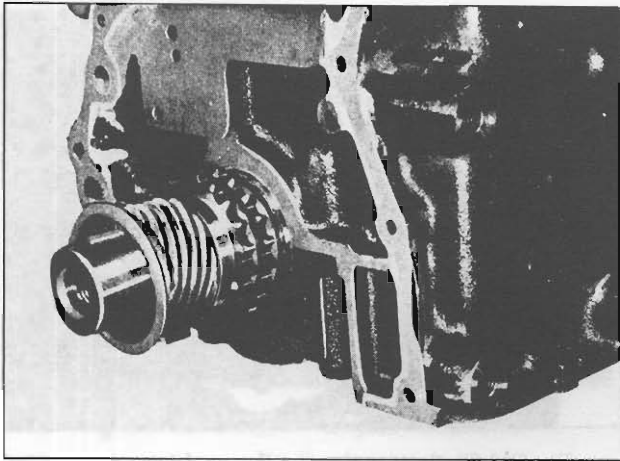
Crankshaft sprocket and distributor drive gear
